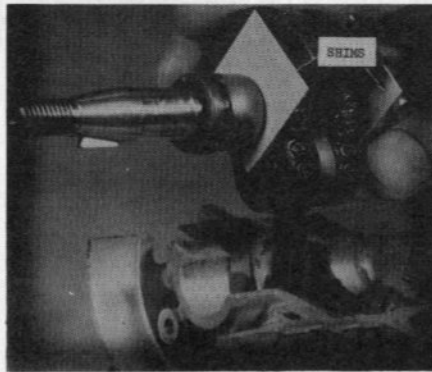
View showing placement of shims (Fig. HL40-6) between thrust washers (14—Fig. HL40-2, HL40-3 or HL40-4) and bearings (13) for correct crankshaft assembly. Refer to text.
